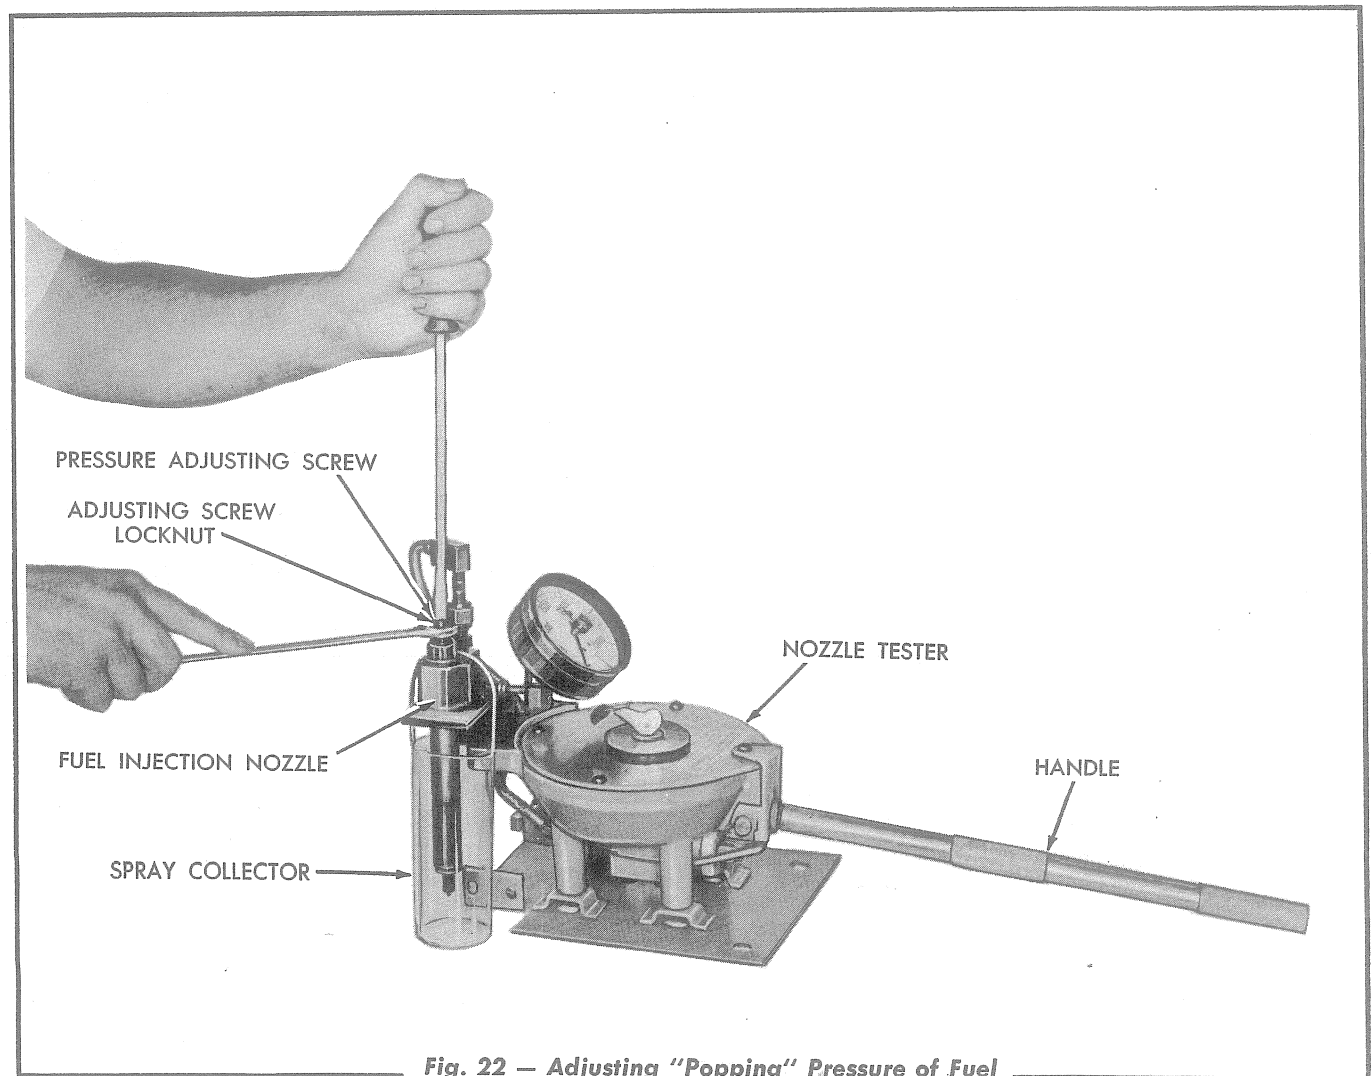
Adjusting "Popping" Pressure of Fuel Injection Nozzle (Tractors Serial No. 4001 and Above)
